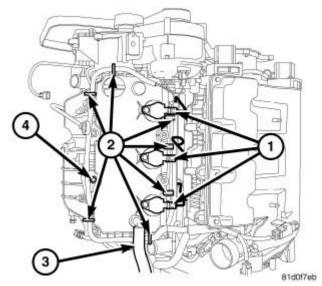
IGNITION COILS-LH Courtesy of CHRYSLER LLC
